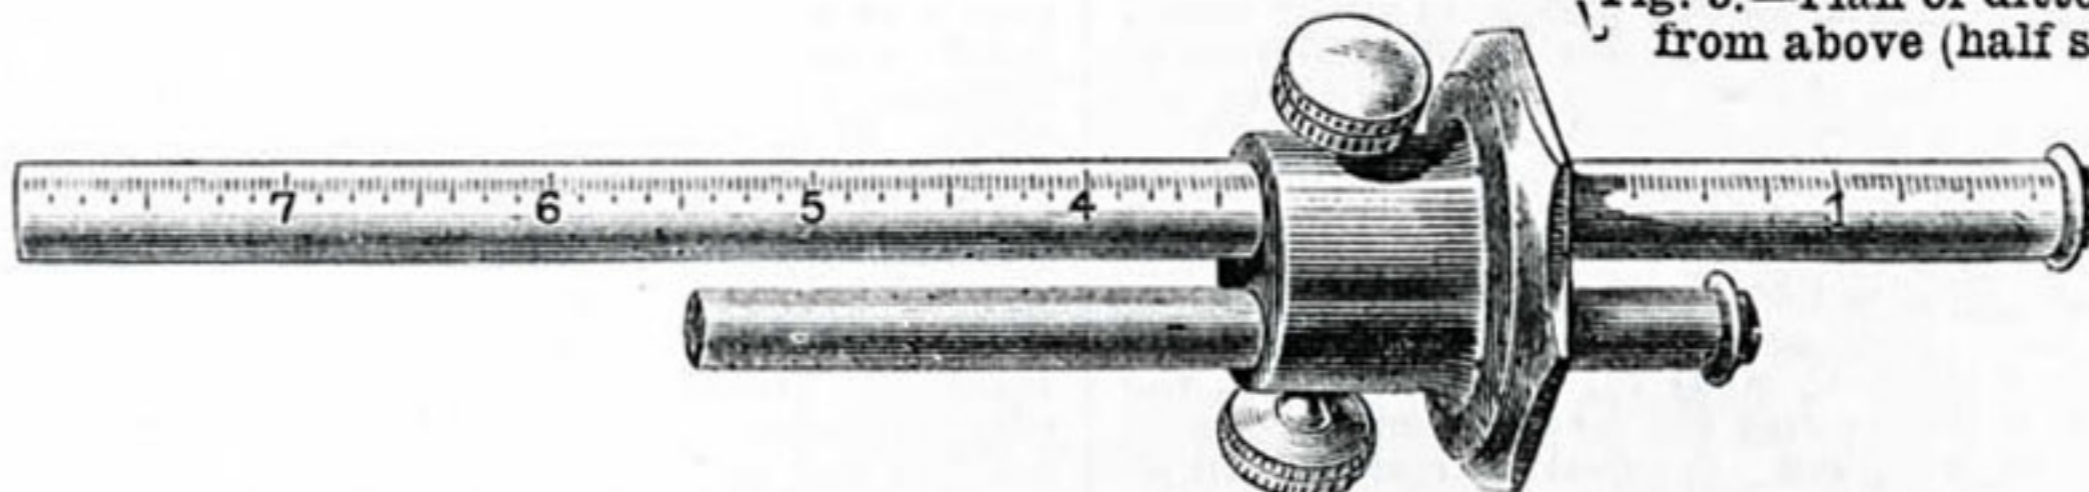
Barrett's Improved Combination Roller Gauge (half size).
